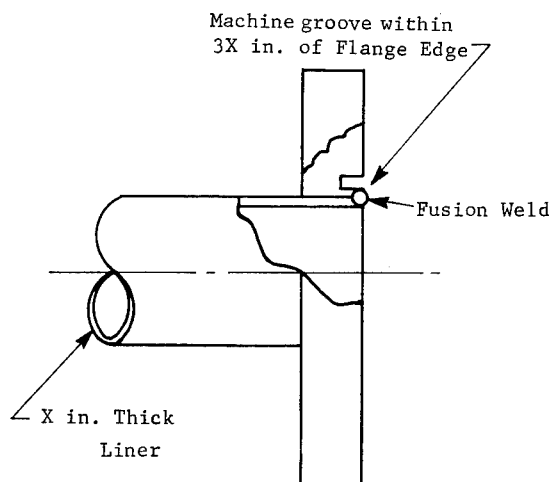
Connecting Liner and End Fitting Using Fusion Weld
